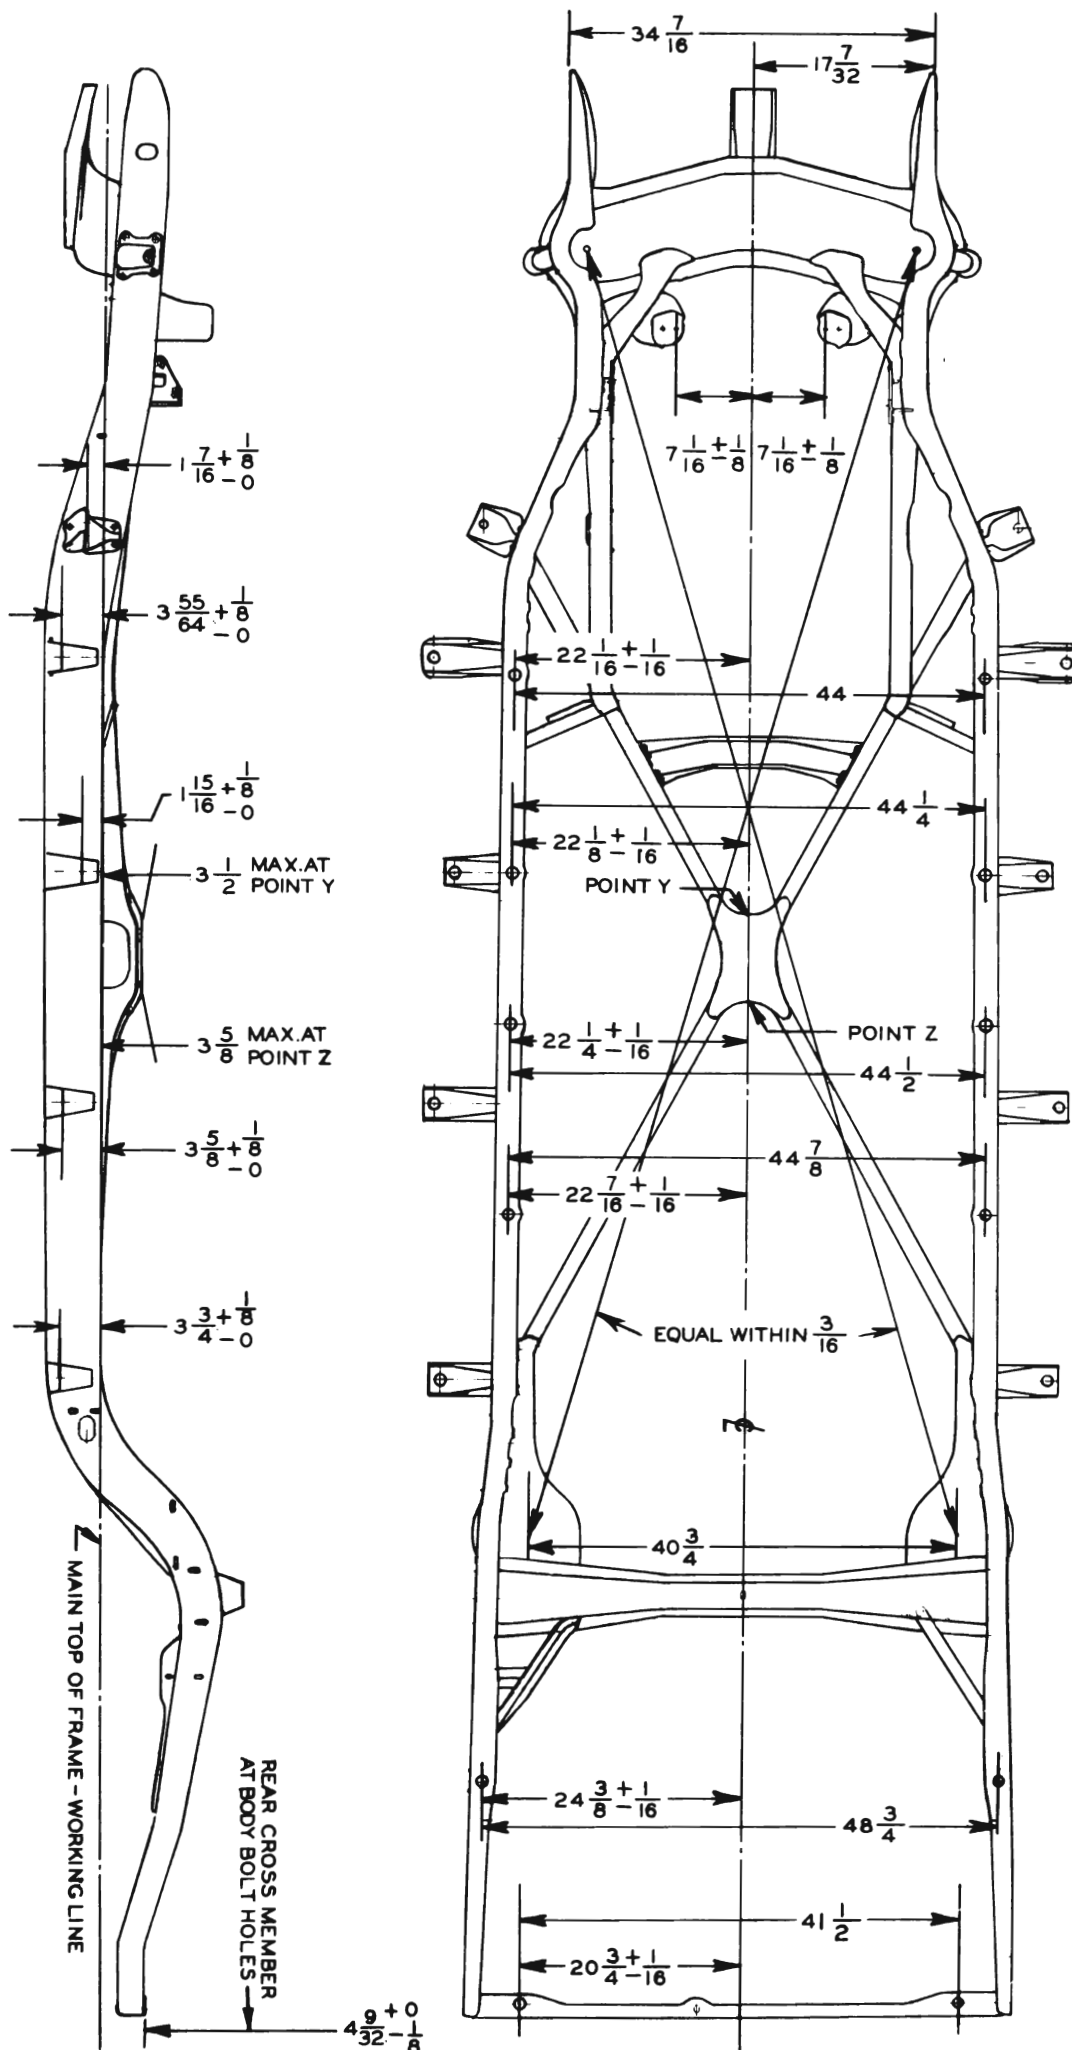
Frame Checking Dimensions—1948 Series 70
